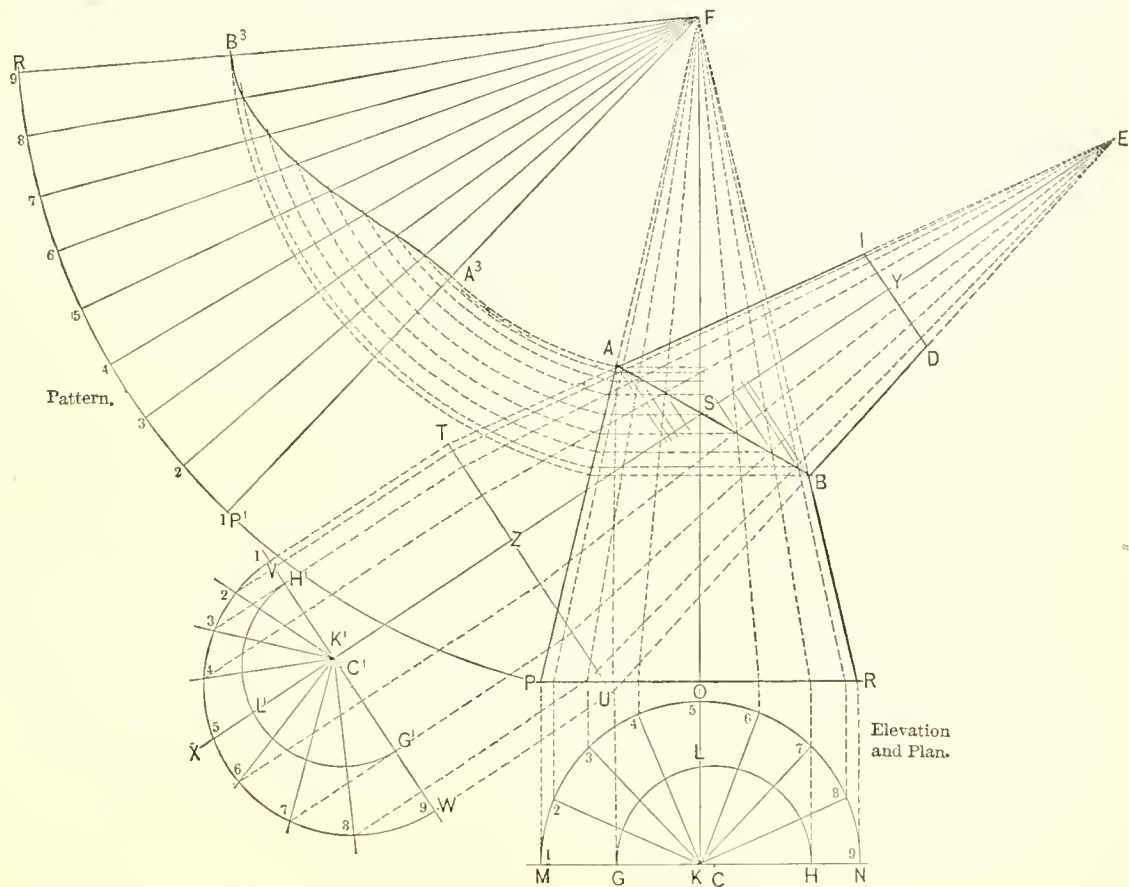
Two-Piece Elbow in Tapering Pipe.
